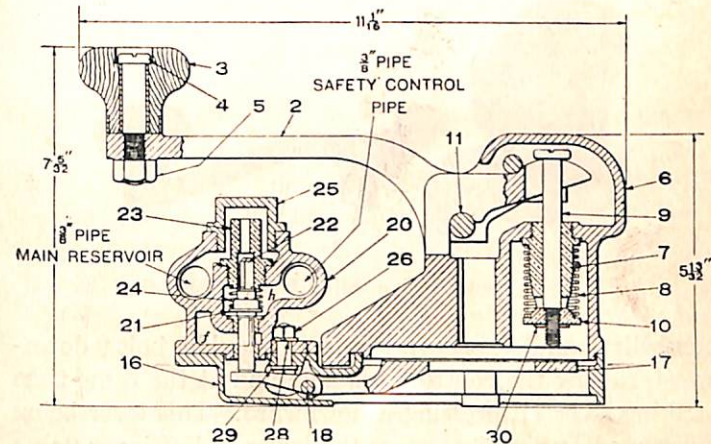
Controller Handle and Pilot Valve—Sectional View
